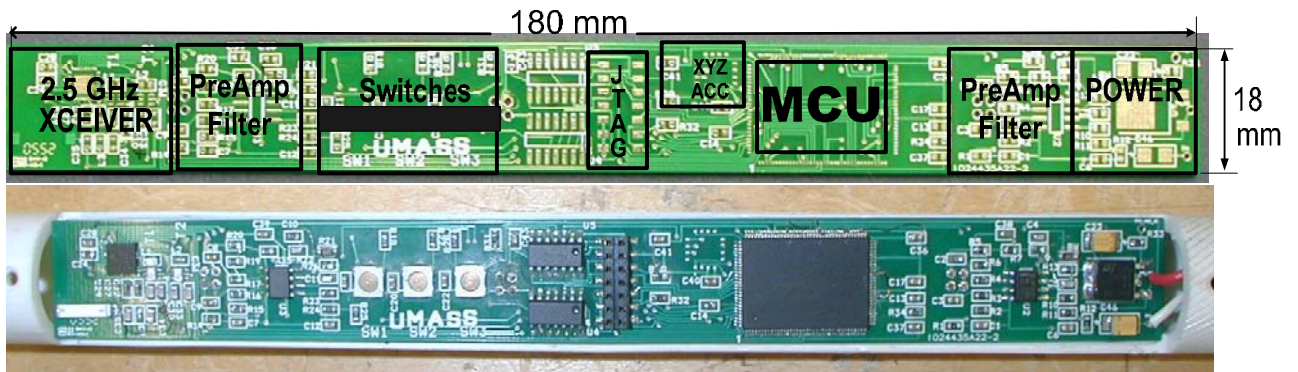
Layout of the Cane PCB and the PCB mounted in the cane.
